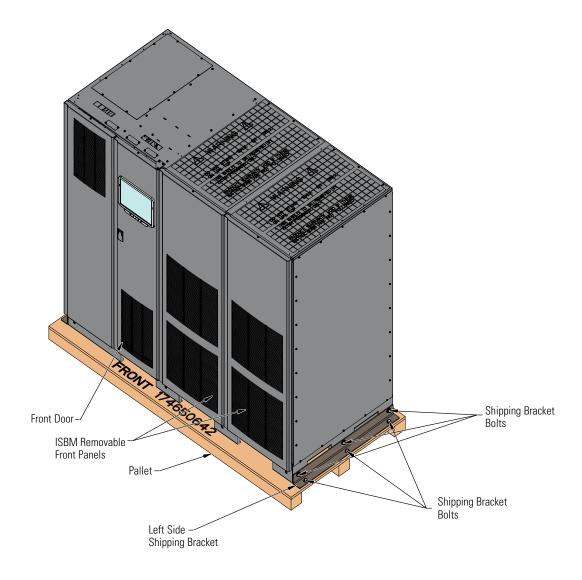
Removing the ISBM Section Right Side Shipping Bracket
